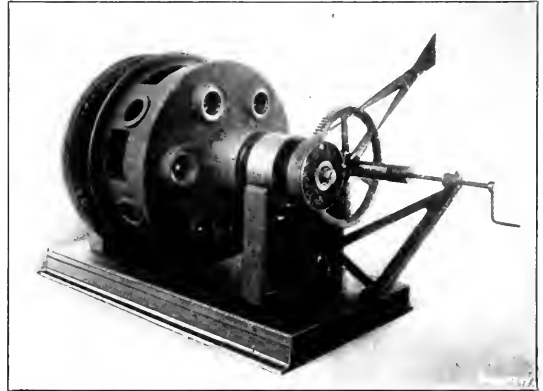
Opposite End of Fixture showing Drive and Feed Mechanism
